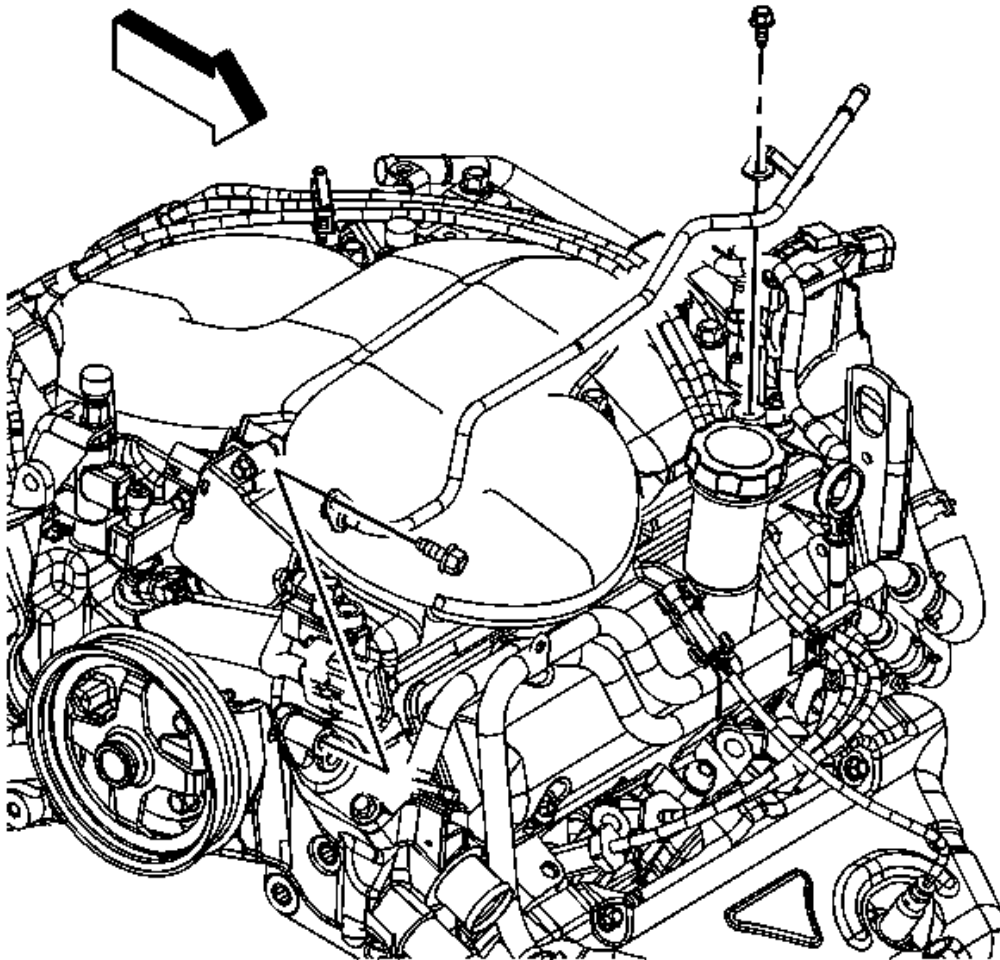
Identifying Radiator Surge Tank Pipe Bolts
